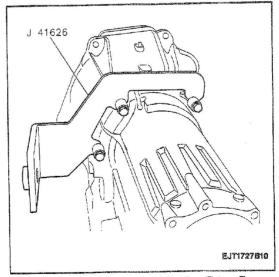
Mounting J 41626 Holding Fixture To Transmission Case.
